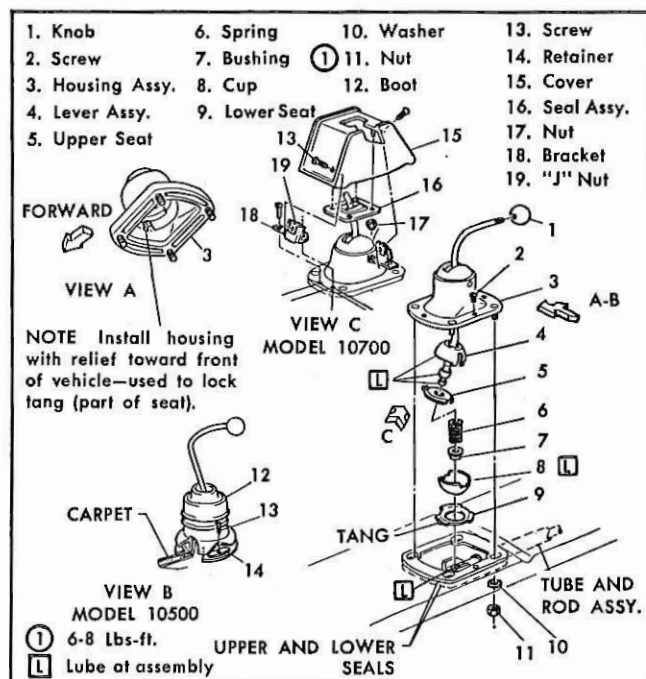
Corvair 3 & 4 Speed Gearshift Control
